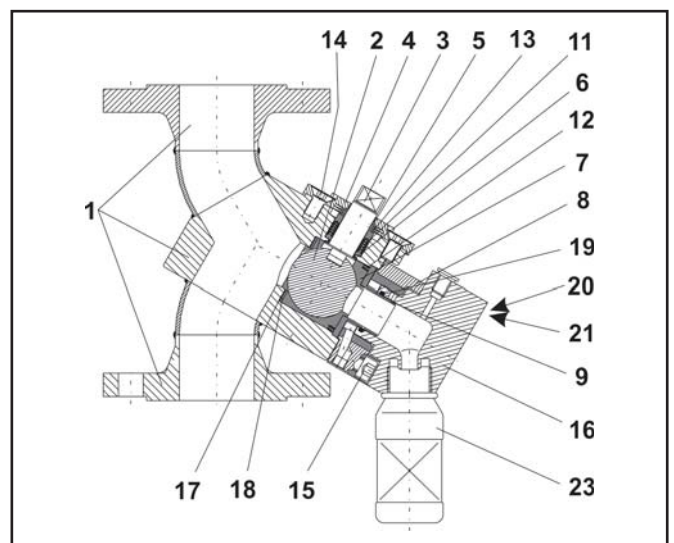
Sectional view of sampling valve BR 27g => For parts list, see Table 1 on page 2
